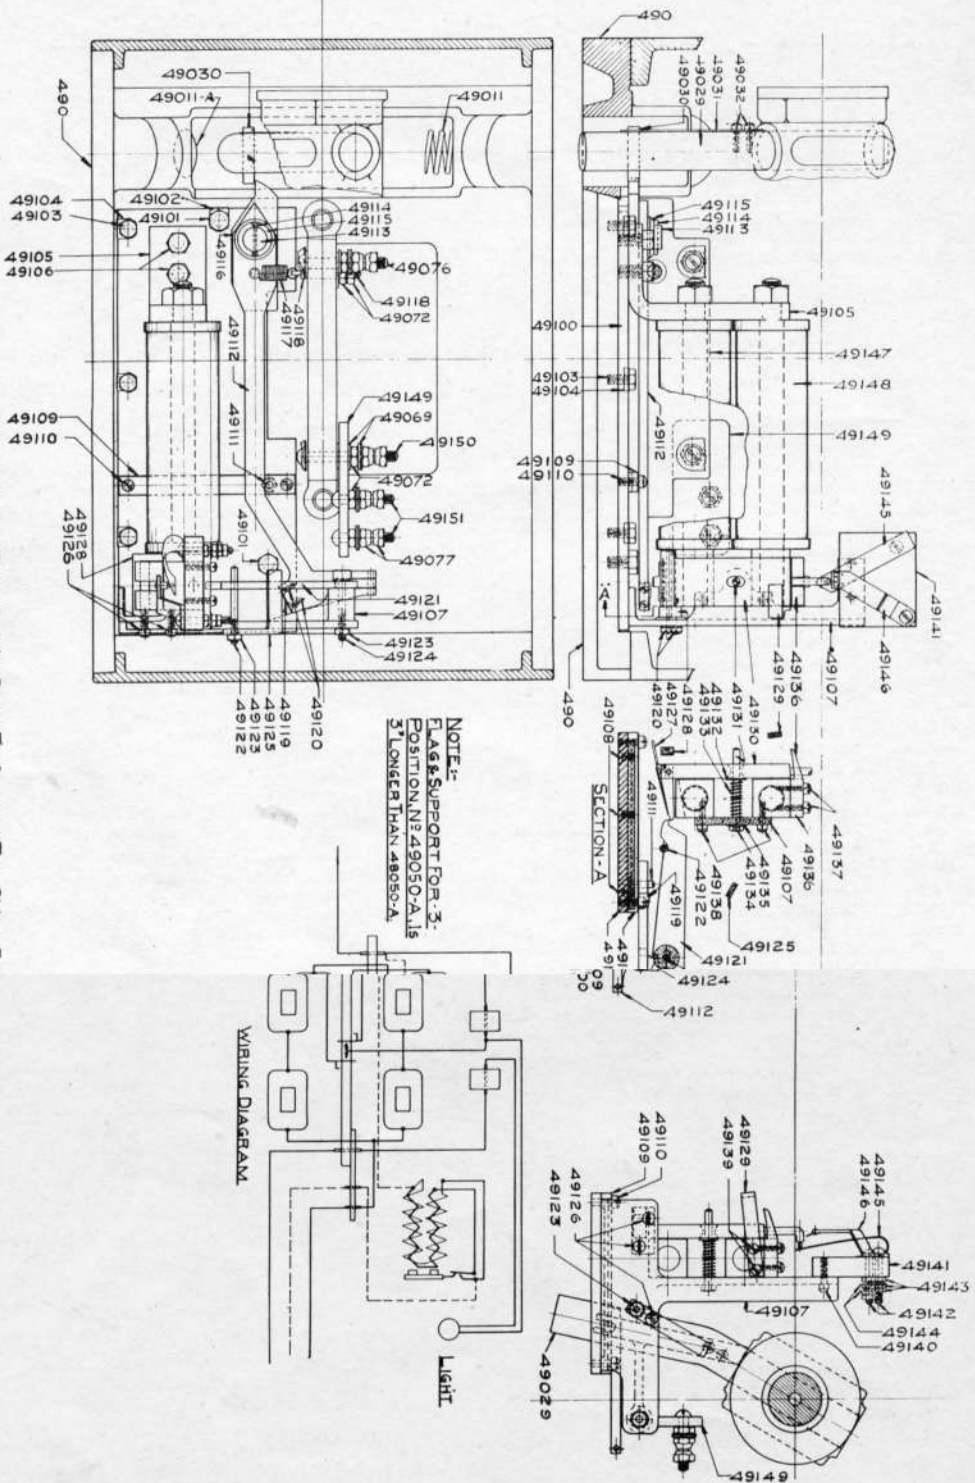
Assembly Type KC-8 Magnetic Flagman with Type OA-8 Auxiliary "Out-of-Order" Signal.
